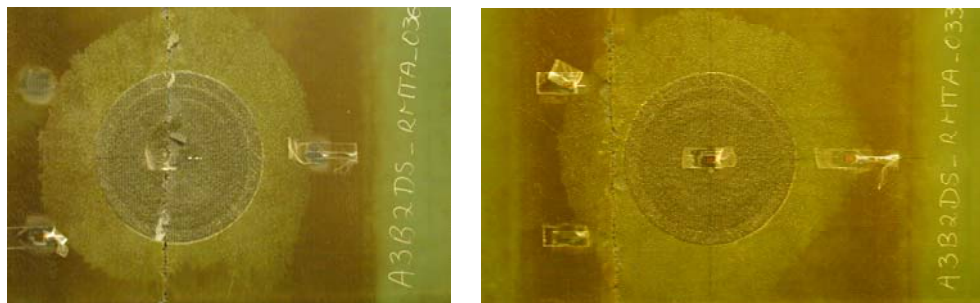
FAILURE MODES FOR THE 1/8-inch UNDAMAGED LARGE FOUR-POINT BENDING BEAMS
